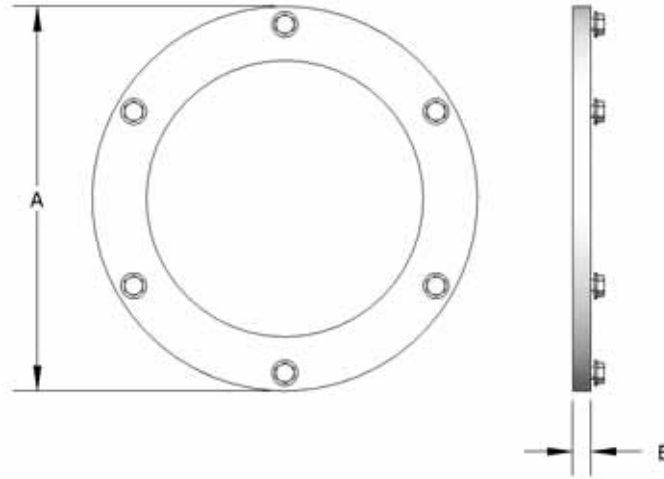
Sentinel DCS-50S and DCS-68 Deck Mount Flange Dimensions
